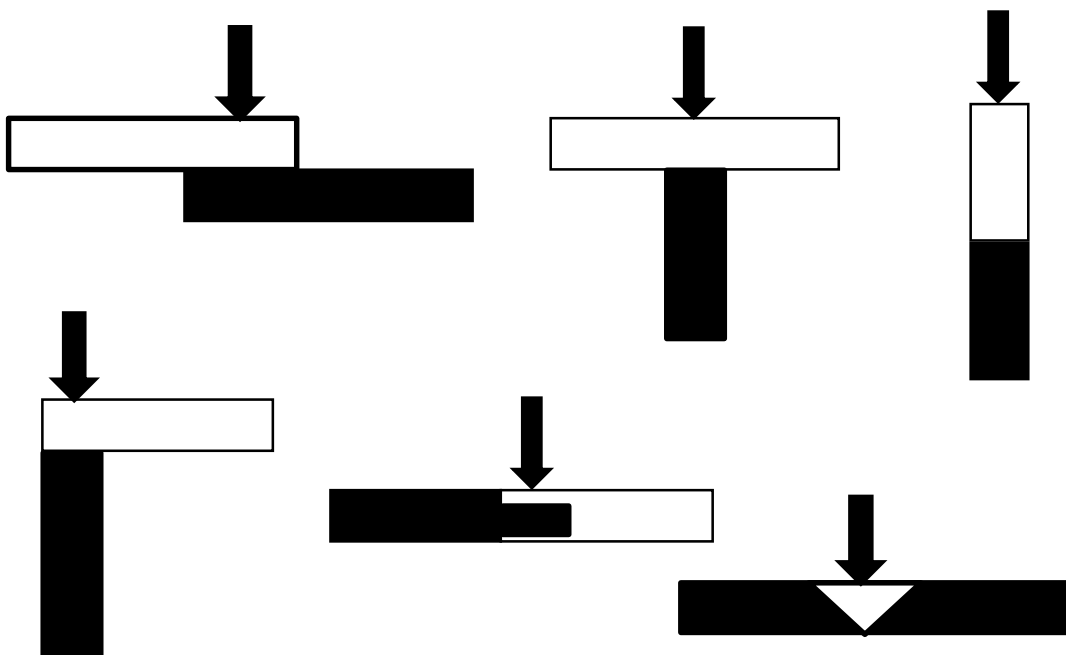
Different possible joint configuration for laser transmission welding process.
